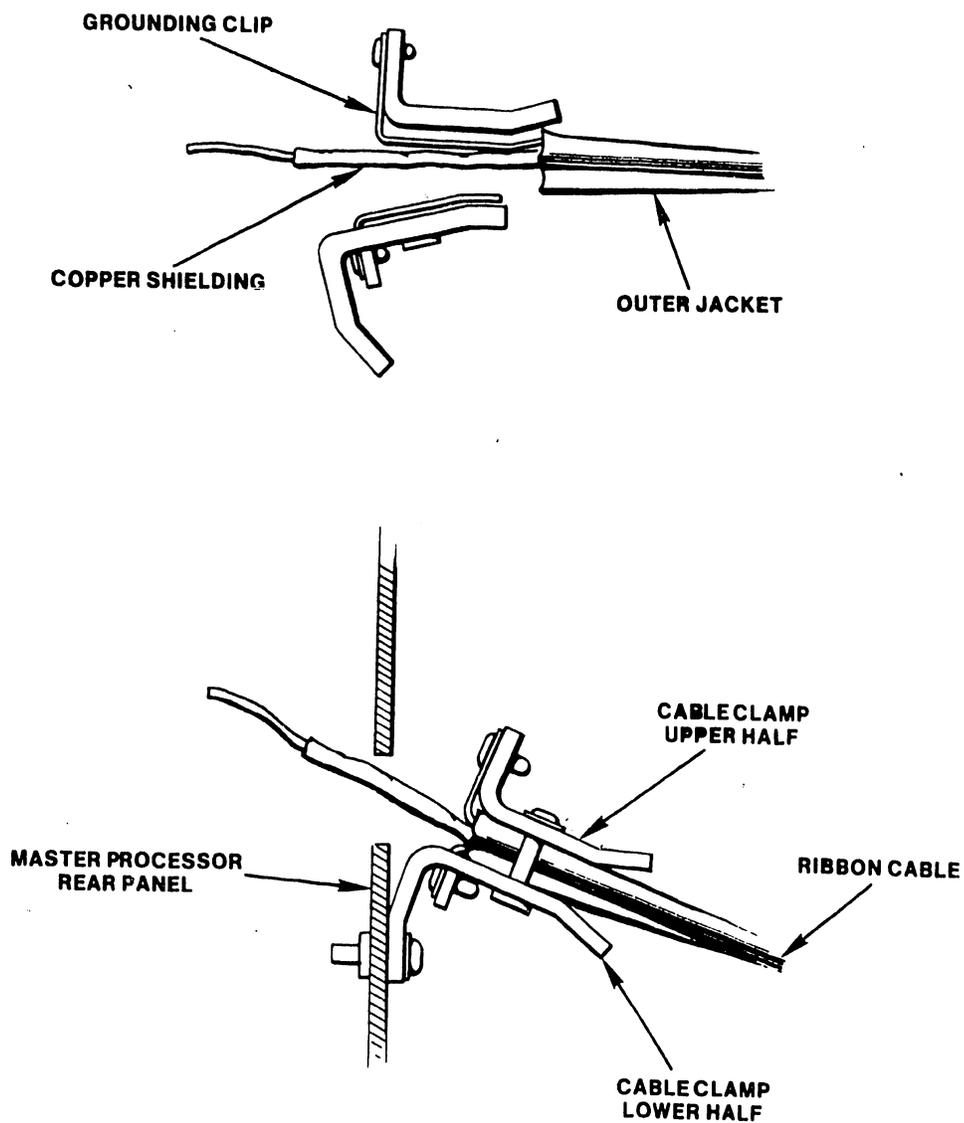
MASTER UNIT DISK CABLE CLAMP
